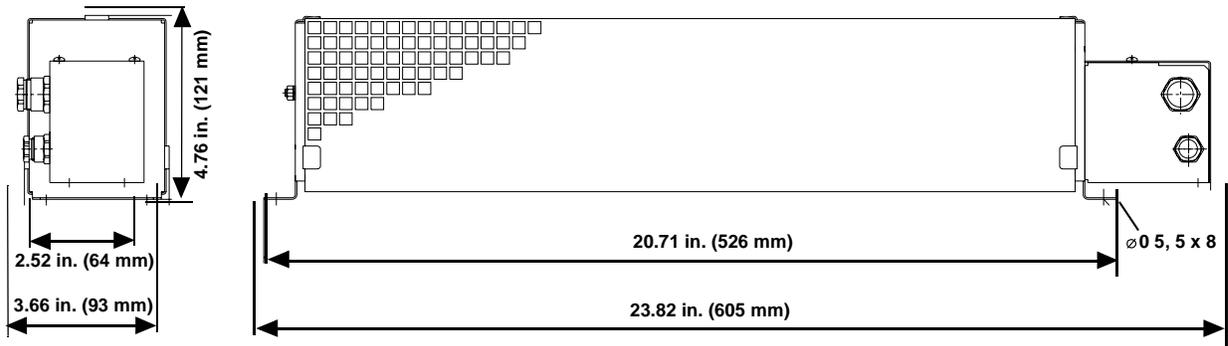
Mounting Dimensions for 460V External Shunt (P/N M.1302.7049)
